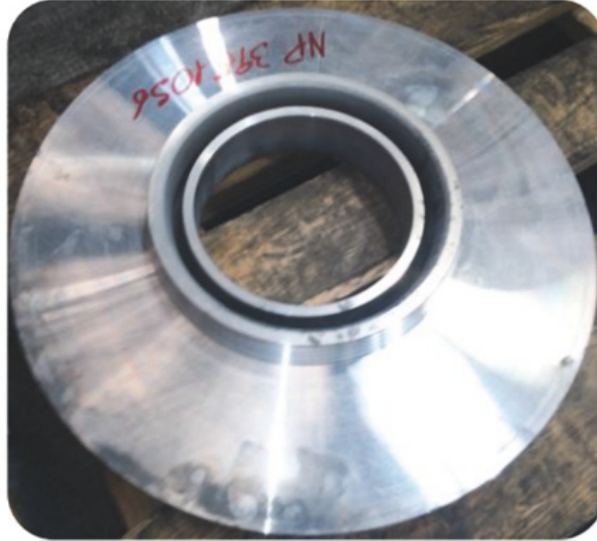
Optimized compressor impeller produced in Aluminum.
